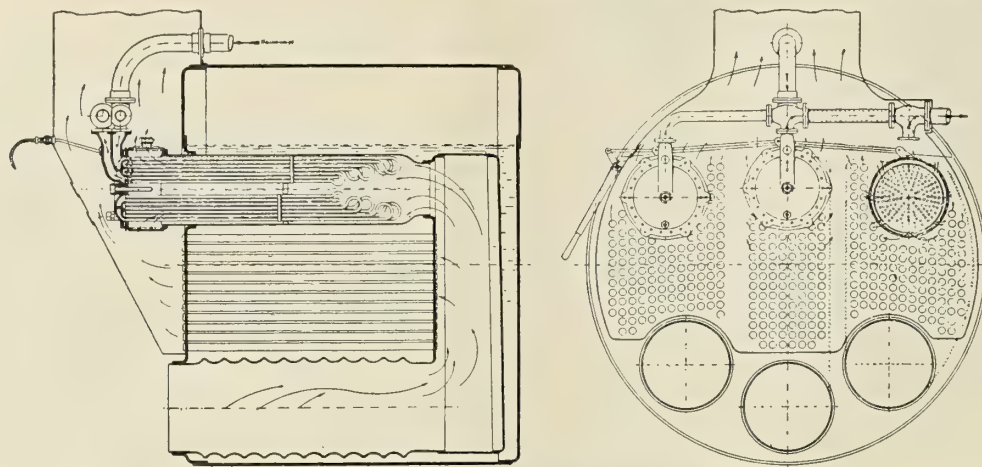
SCHMIDT FLAME TUBE SUPERHEATER.
